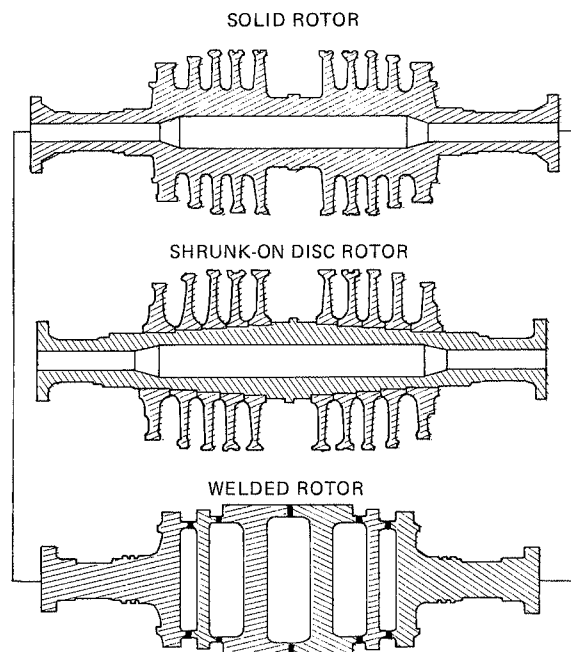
Key types of rotors for large and small turbines.
